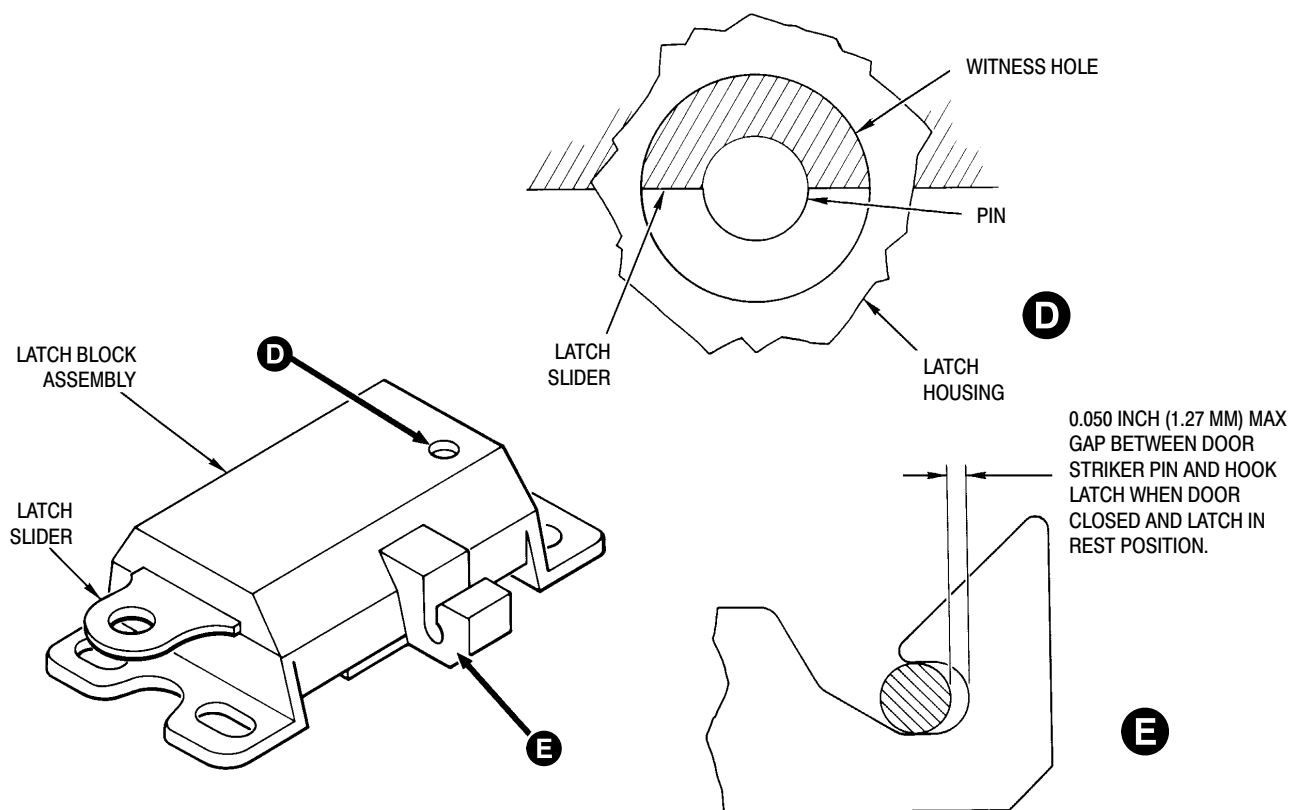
Door Handle Positions and Latch Engagement (Sheet 1 of 3)
